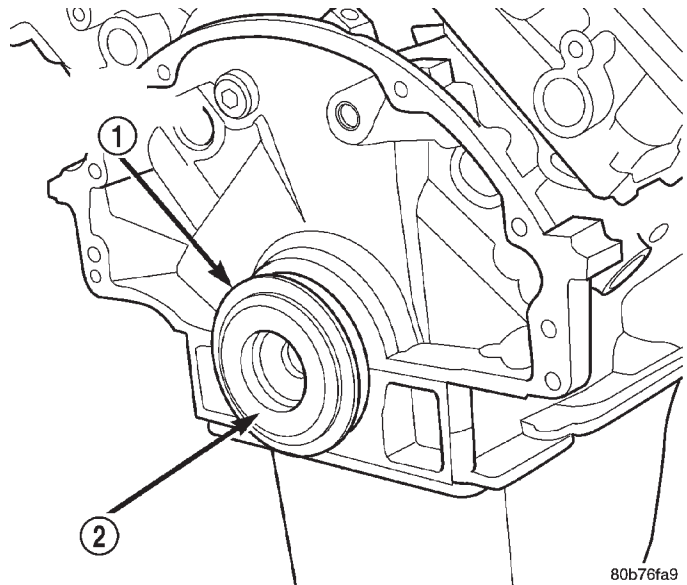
Crankshaft Rear Oil Seal Guide Special Tool 8349-2 and Oil Seal
